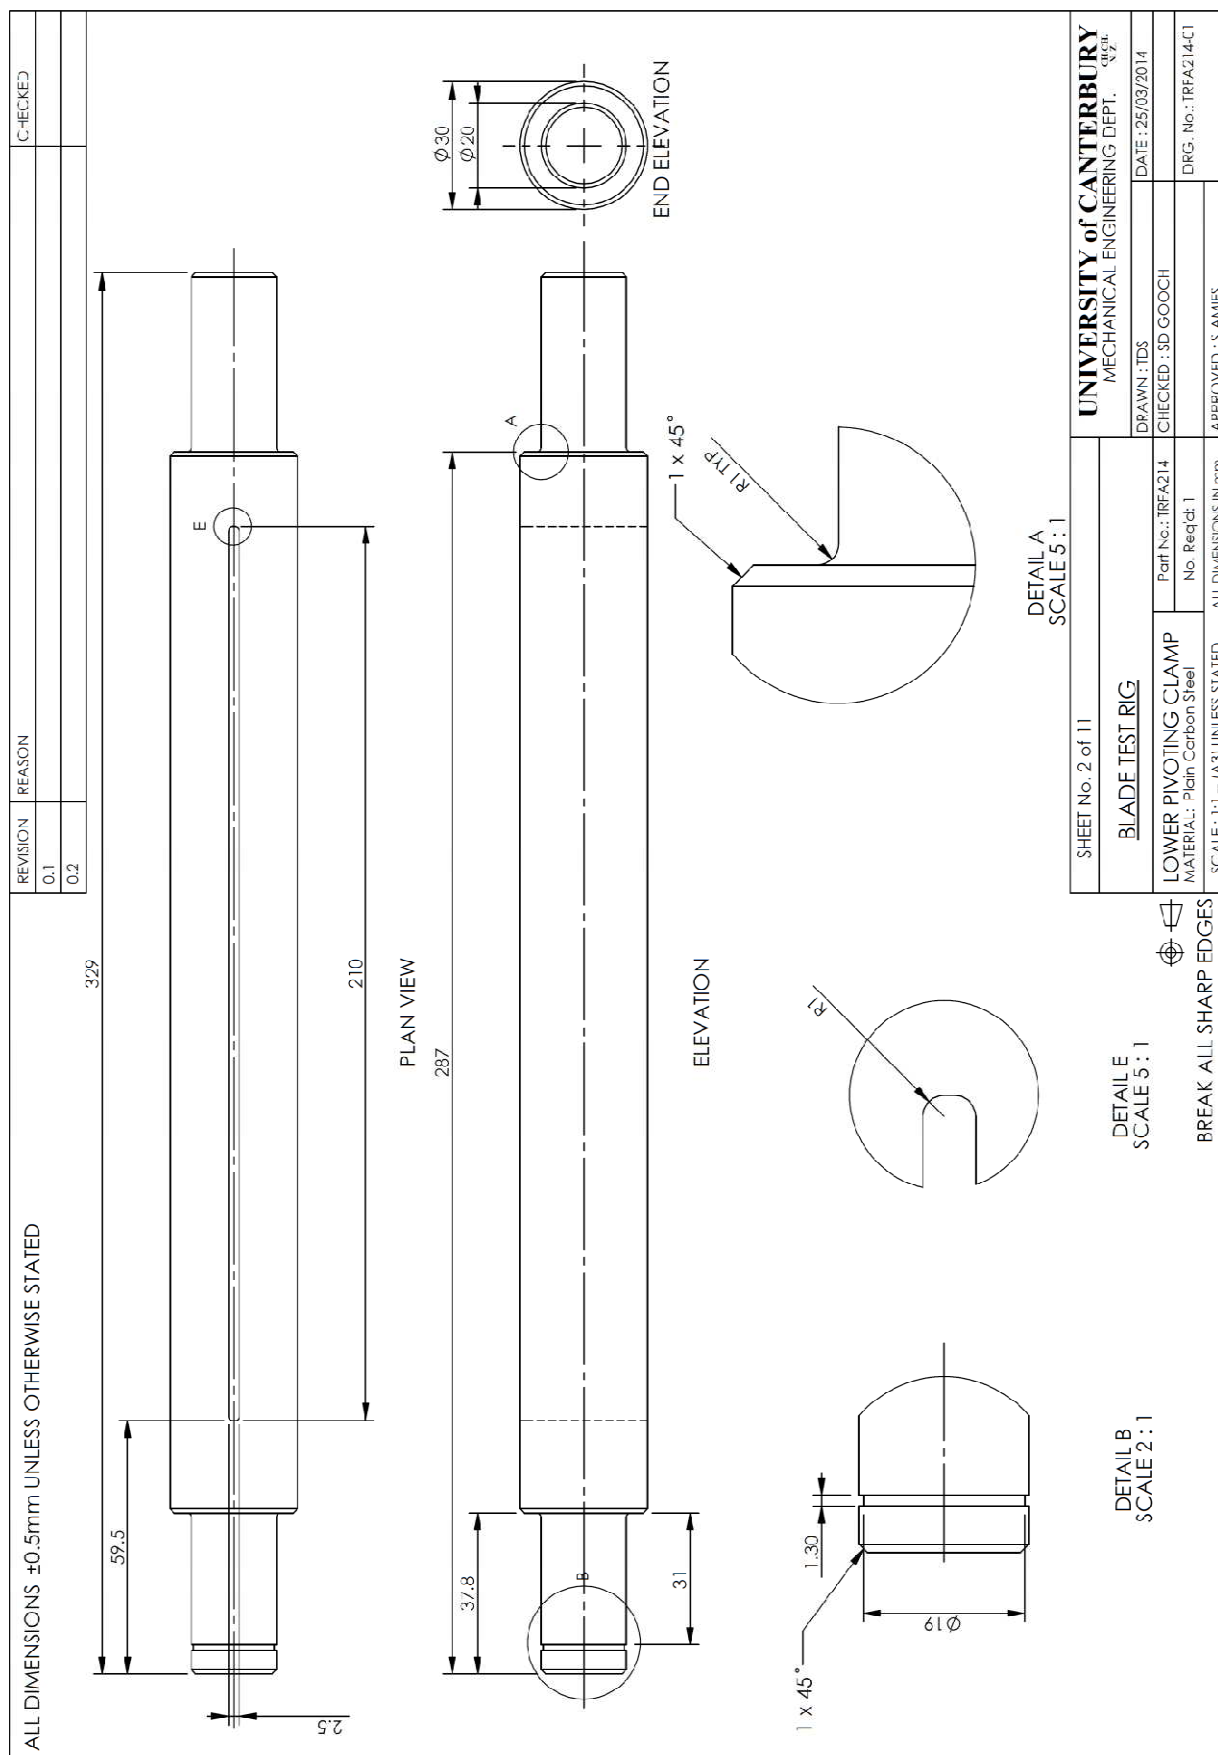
Manufacturing drawing of lower pivoting clamp in fatigue test rig.
